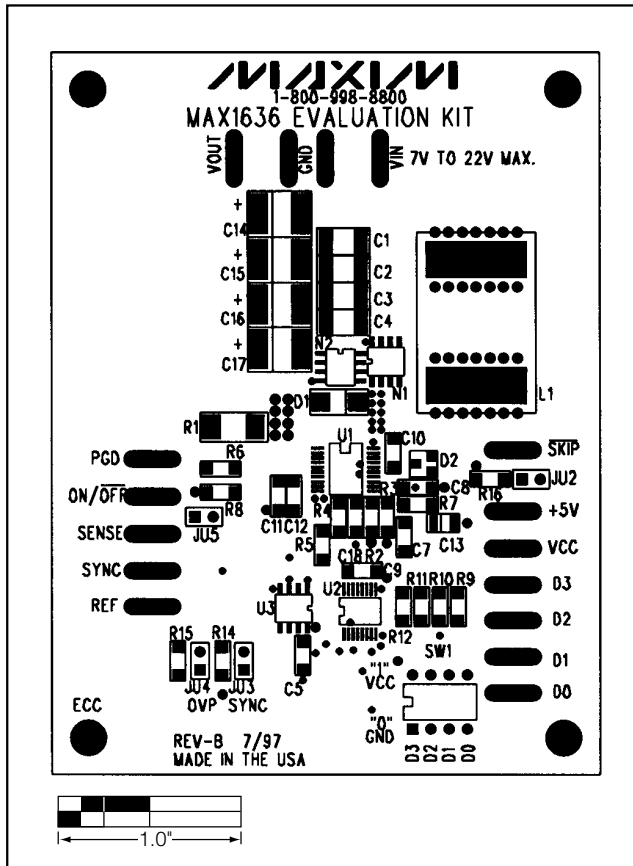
MAX1636 EV Kit Component Placement Guide—Component Side
